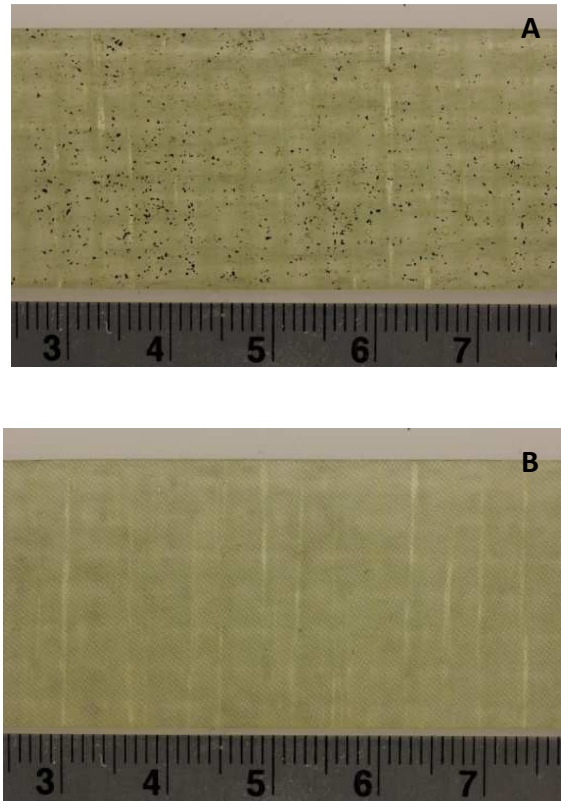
surface finishing of specimen manufactured with VARTM technique (A), (B).
